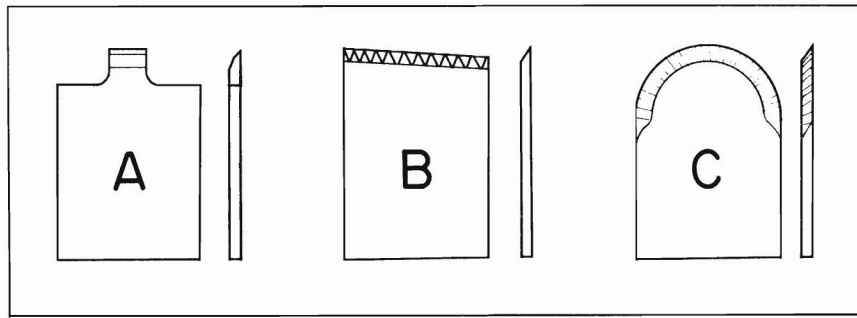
Three experimental blade designs. All had the same body width, length, thickness, tolerances, and tempered tool steel. Only the shape and width of the cutting end has been altered to obtain a path that is clear and readable without having to exert excessive pressure to cut the path. Blade A is narrow, $\frac{3}{16}$ inch, and set to protrude 1 mm. Blade B was angled and notched to cut a 1-inch track varying from 0 to 2 mm deep in the frozen flesh. Blade C was shaped to simulate an inspector's thumbnail.
